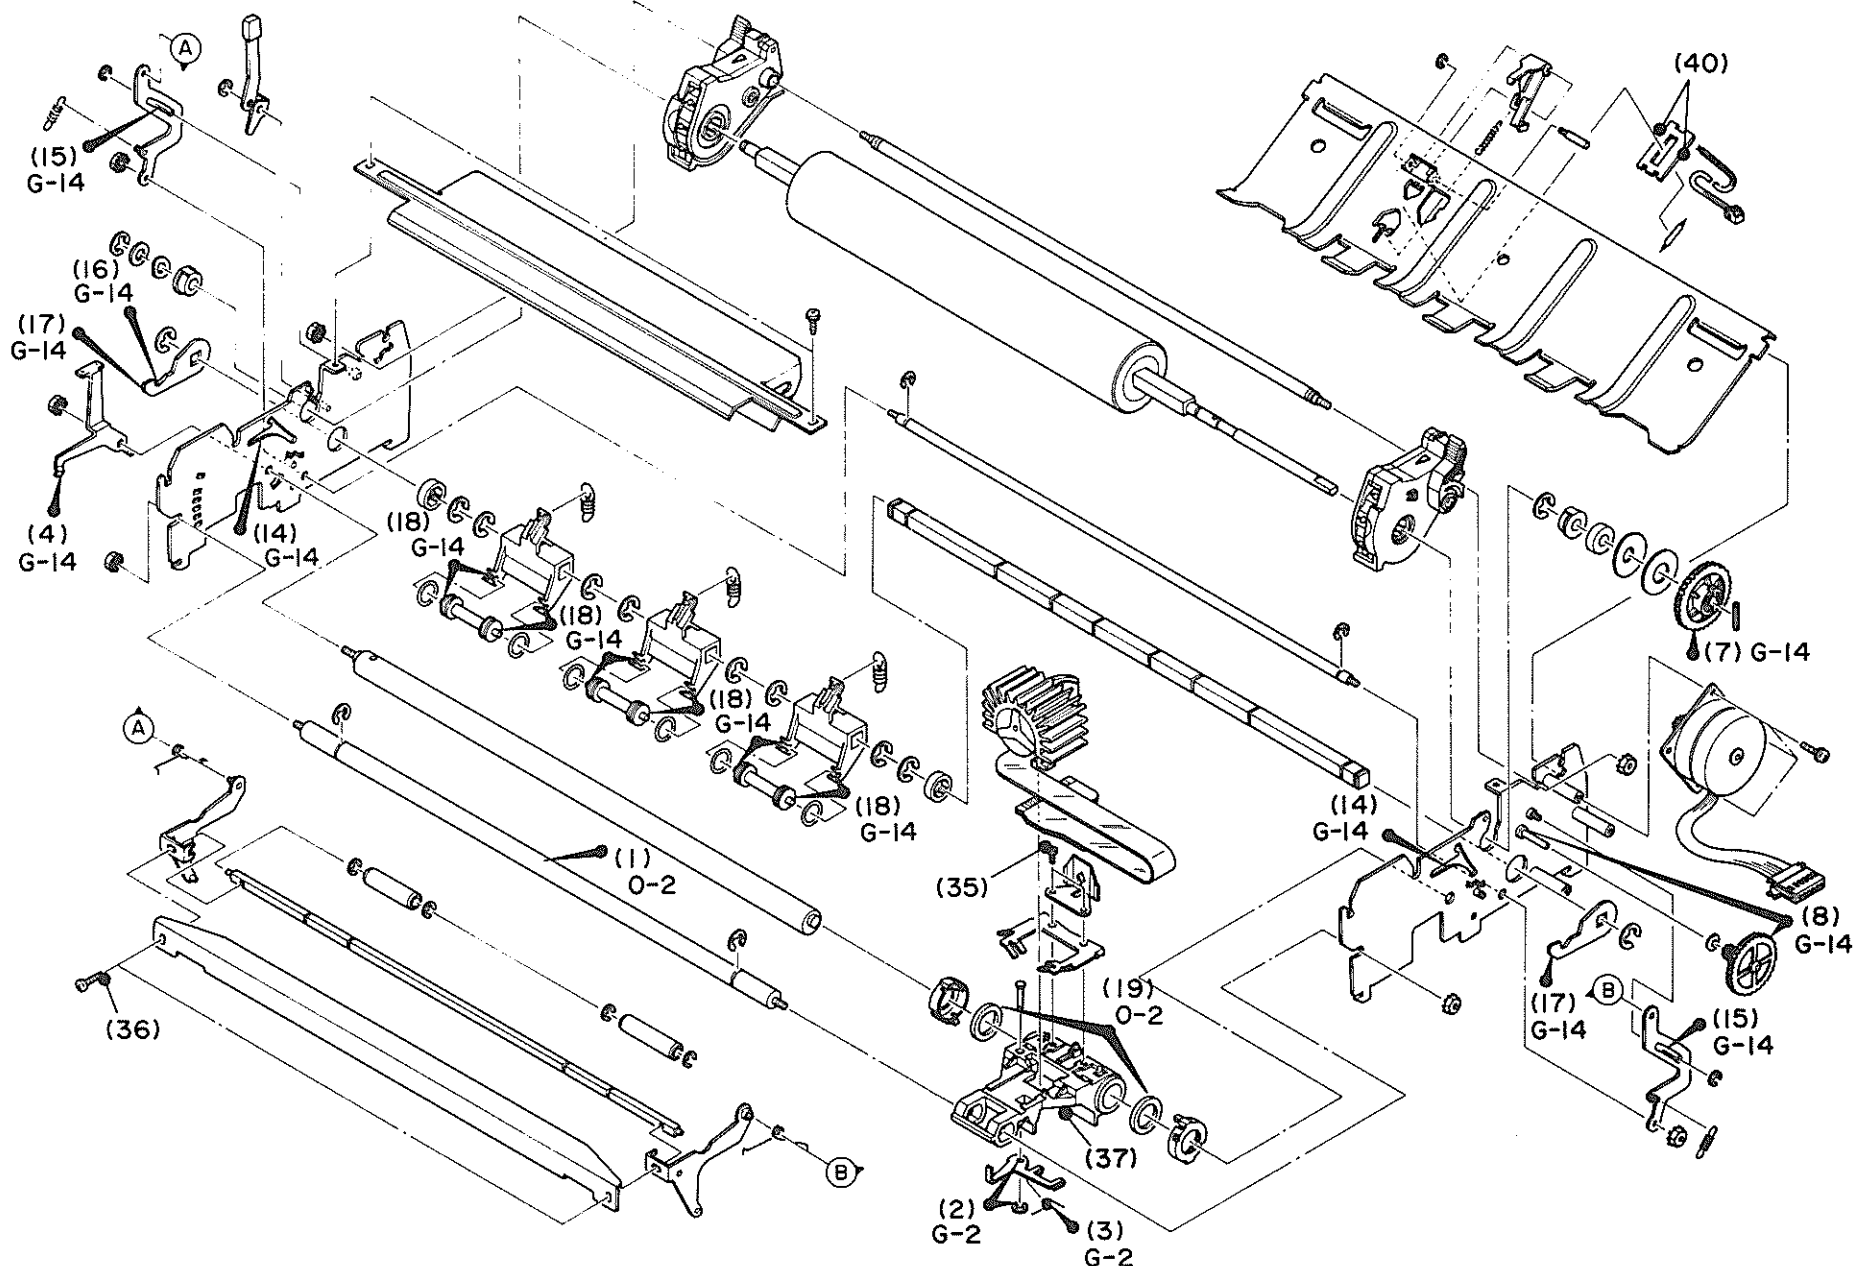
Model-3510 Lubrication and Adhesive Application Points Drawing 2
